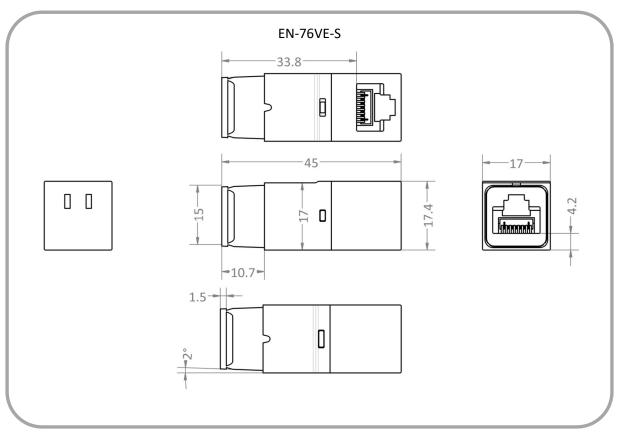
Technical drawings for EN-76VE-S. All dimensions are in millimetres.
